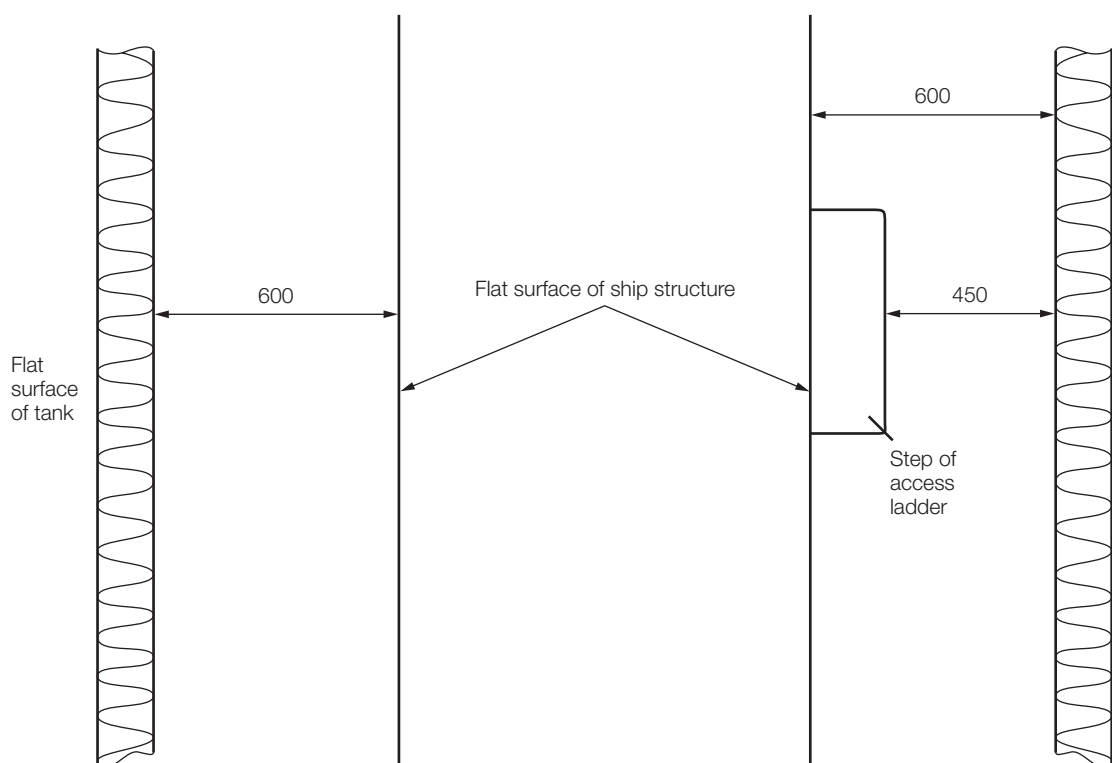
Minimum access clearance in way of fixed access ladders
